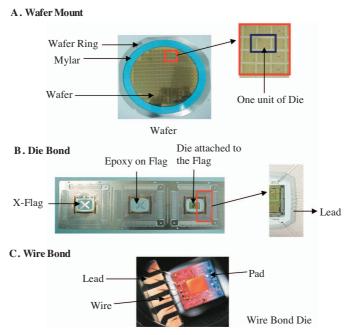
Basic steps in Front End Assembly: A. Wafer Mount, B. Die Bond, C. Wire bond.
